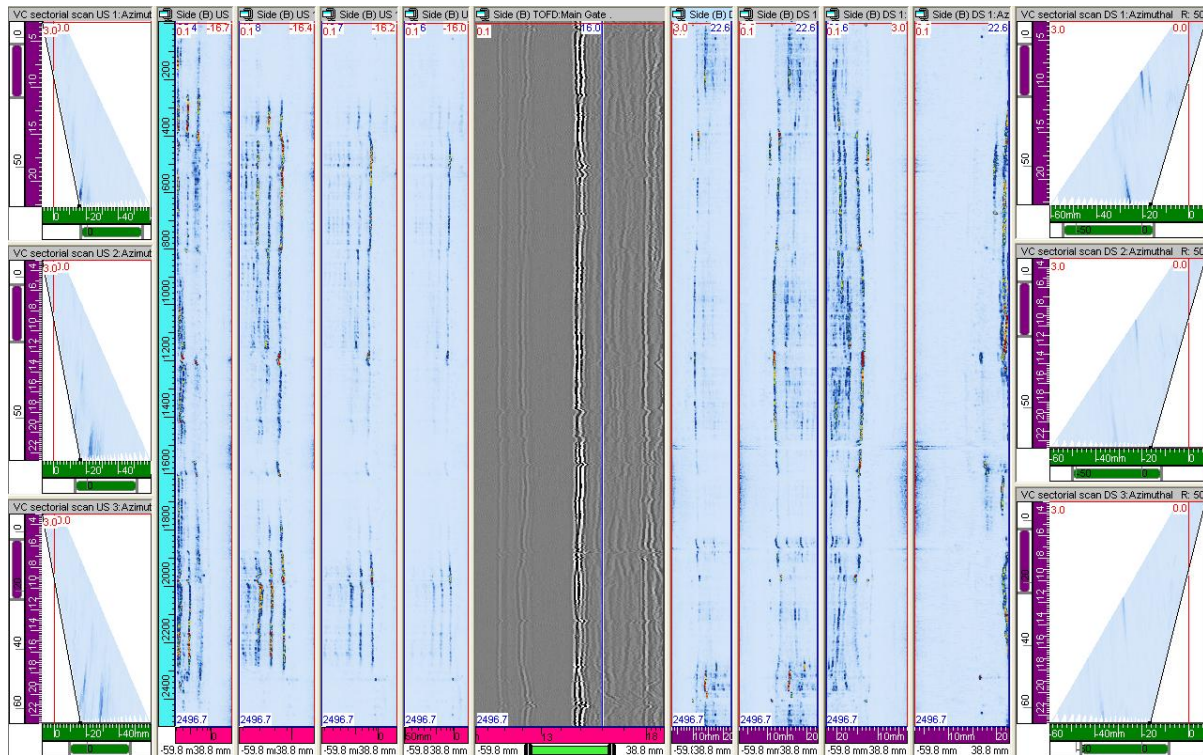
Weld MLA 4809 - EWI LPA Scan Screen Capture
